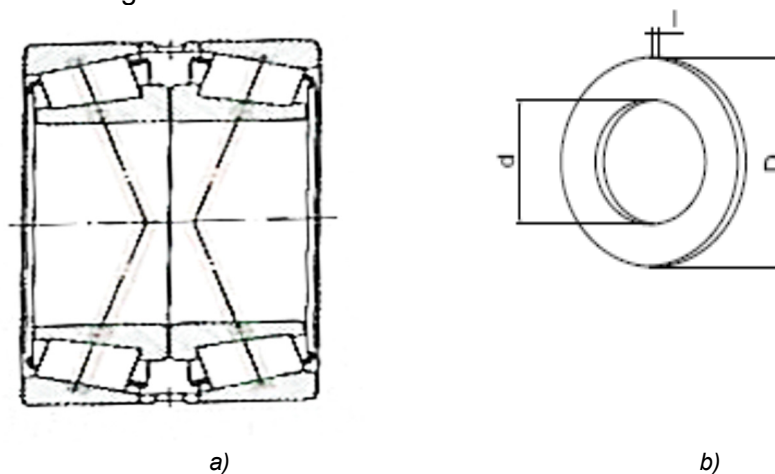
Mounting of taper roller bearings and adjusting the axial clearance
